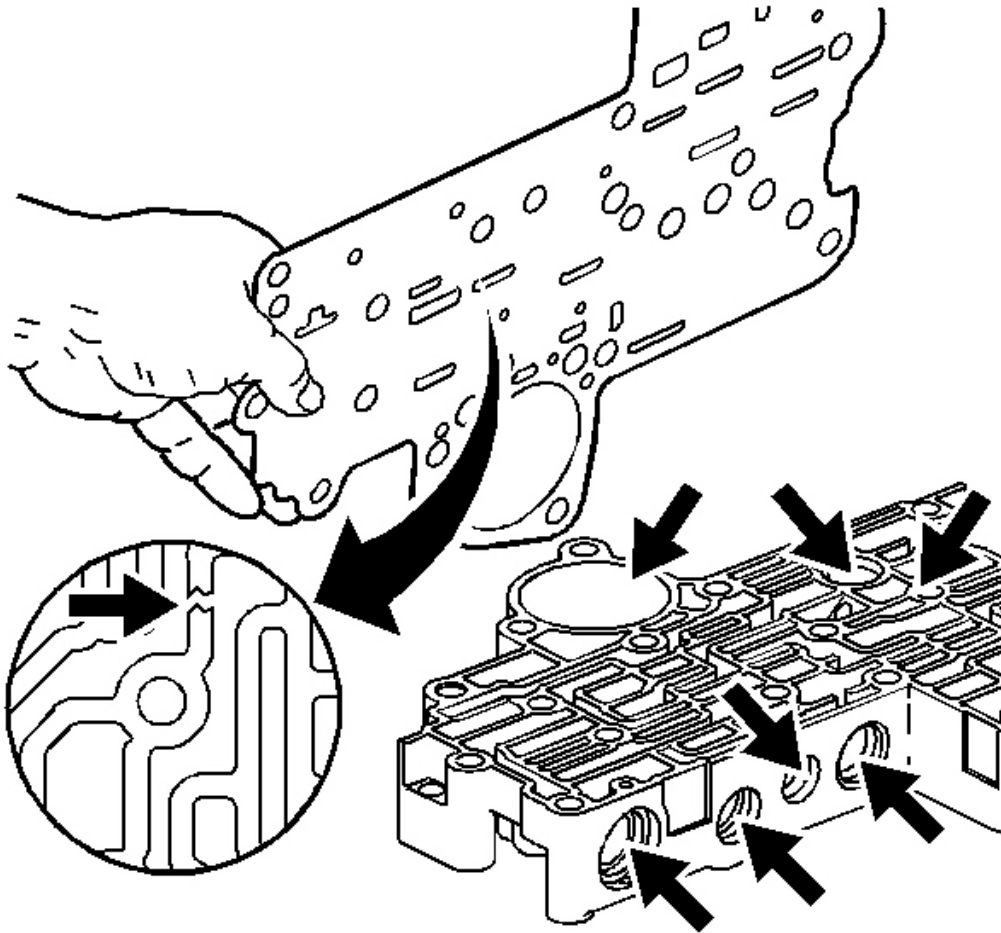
Identifying Upper Control Valve Body Gasket Damage
